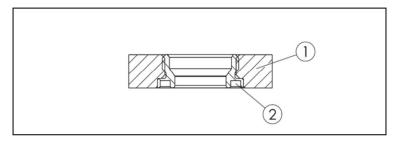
Design of zero point clamping sleeve 6214ZN-01-01
